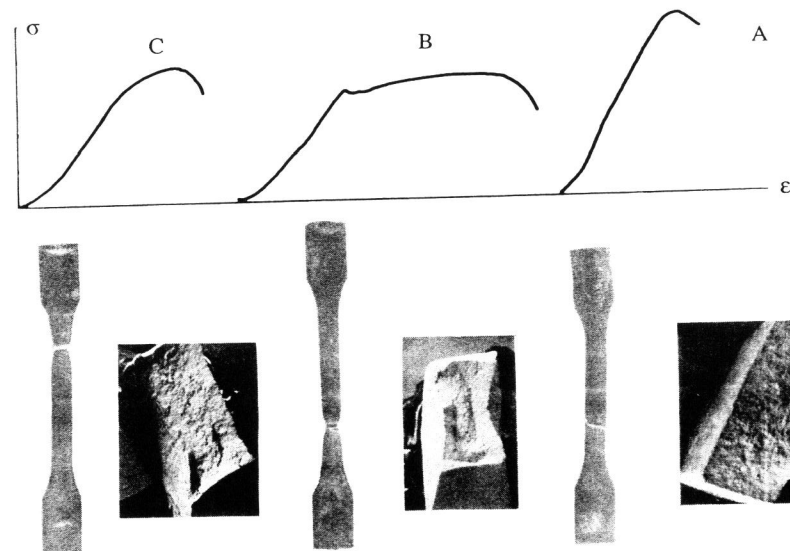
Tensile tests of specimens cut out at positions indicated in Fig. 1.
